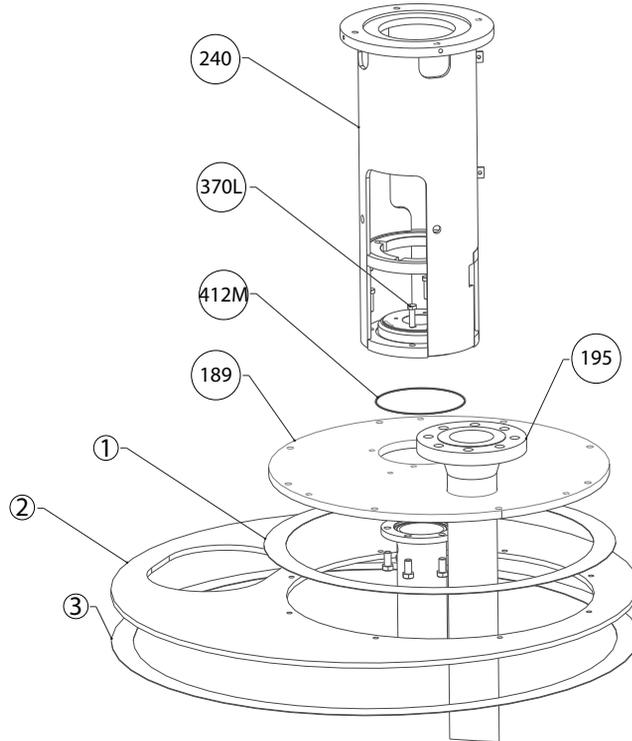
Layout for a standard support plate with the vapor-proof option
